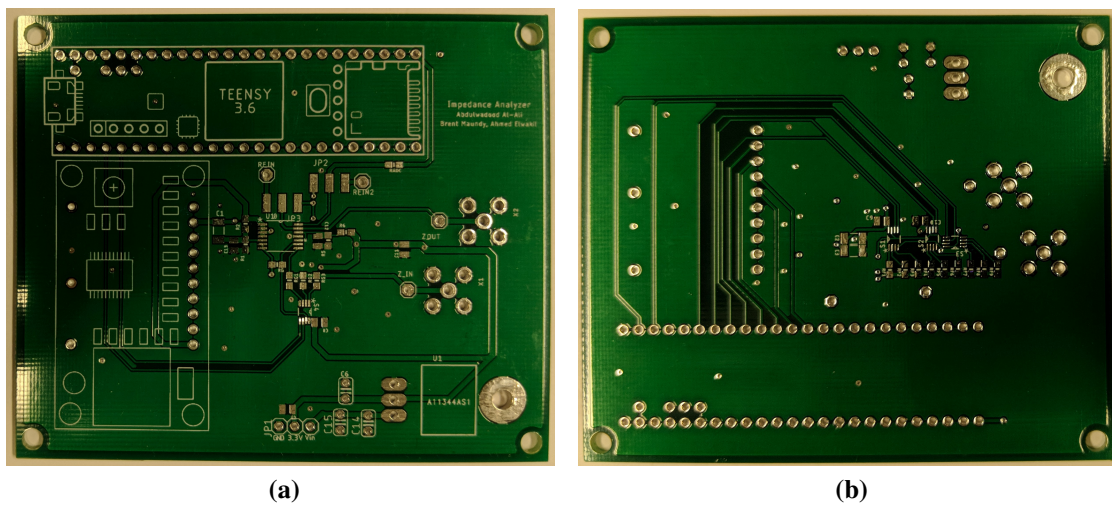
Manufactured PCB (a) top (b) bottom layers
